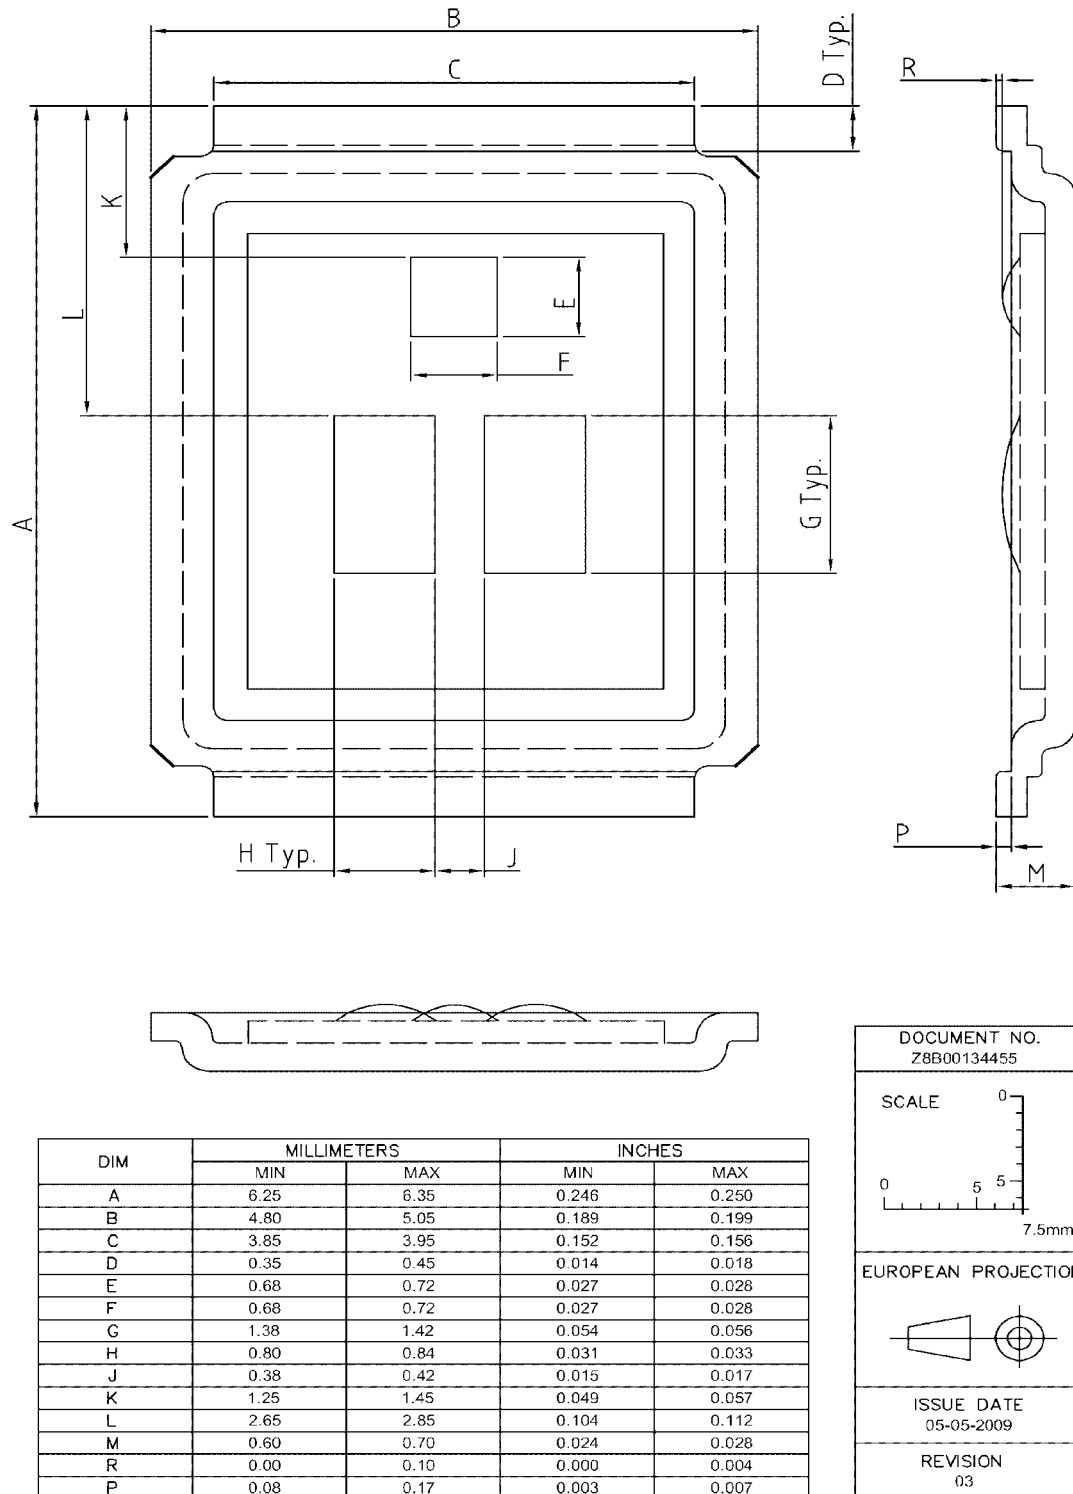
Outlines MG-WDSO-2, dimensions in mm/inches
